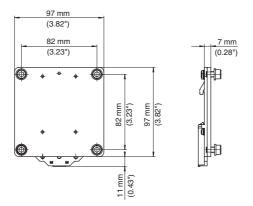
Adapter plate for carrier rail mounting of NivoTec 9000
